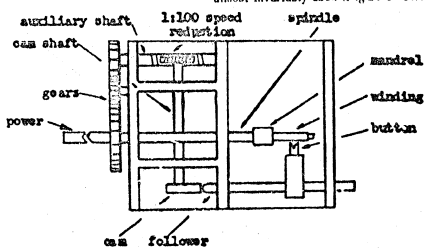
Solenoid Winding Machine with Spring-loaded Cam Follower.
